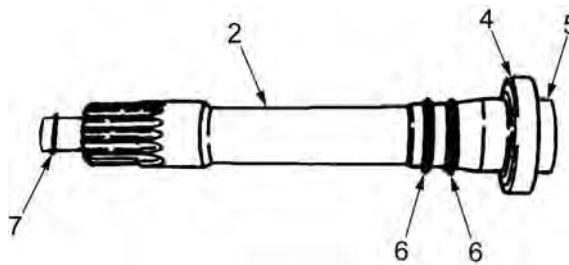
Left Output Shaft Seal Rings and Sleeve Removal.
